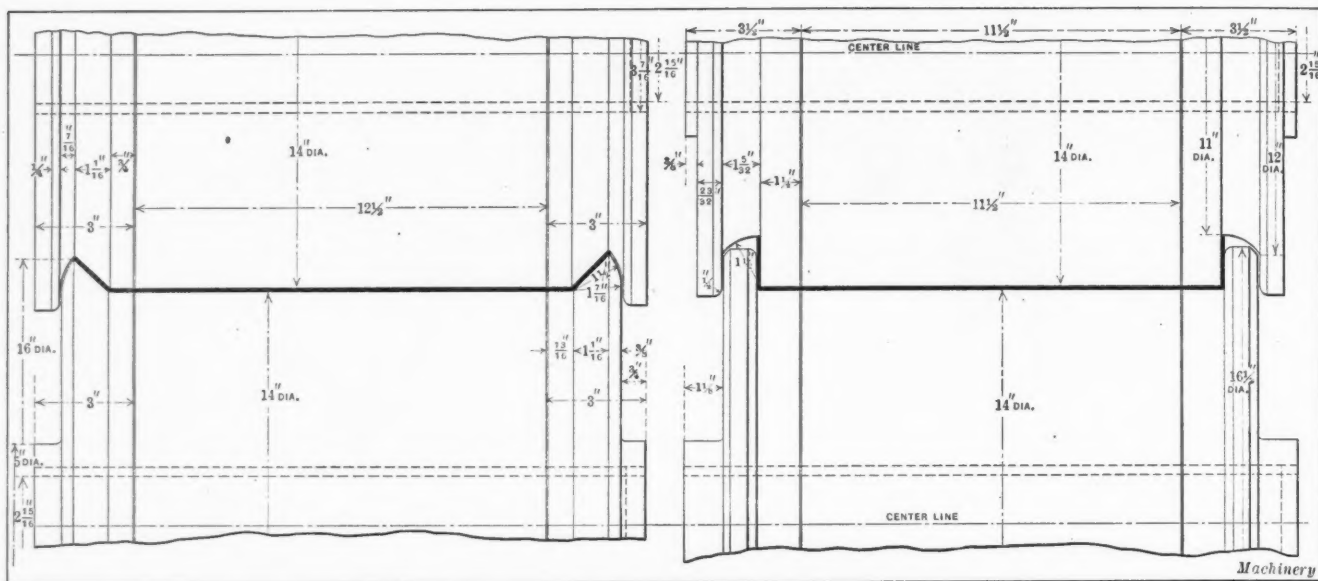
Rolls from Channeling Machine illustrated in Fig. 2
